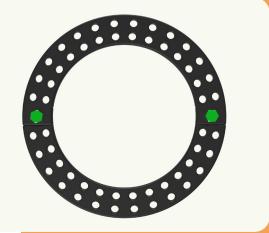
Assemble 2nd Level of Frame (if Needed)
